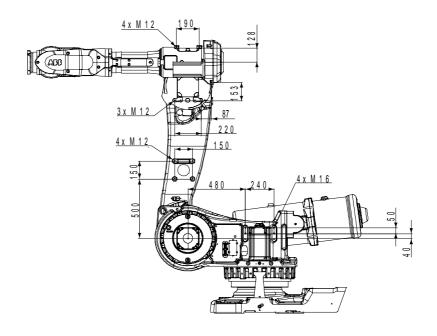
Holes for mounting extra load on upper arm on IRB 6650S (dimensions in mm).
